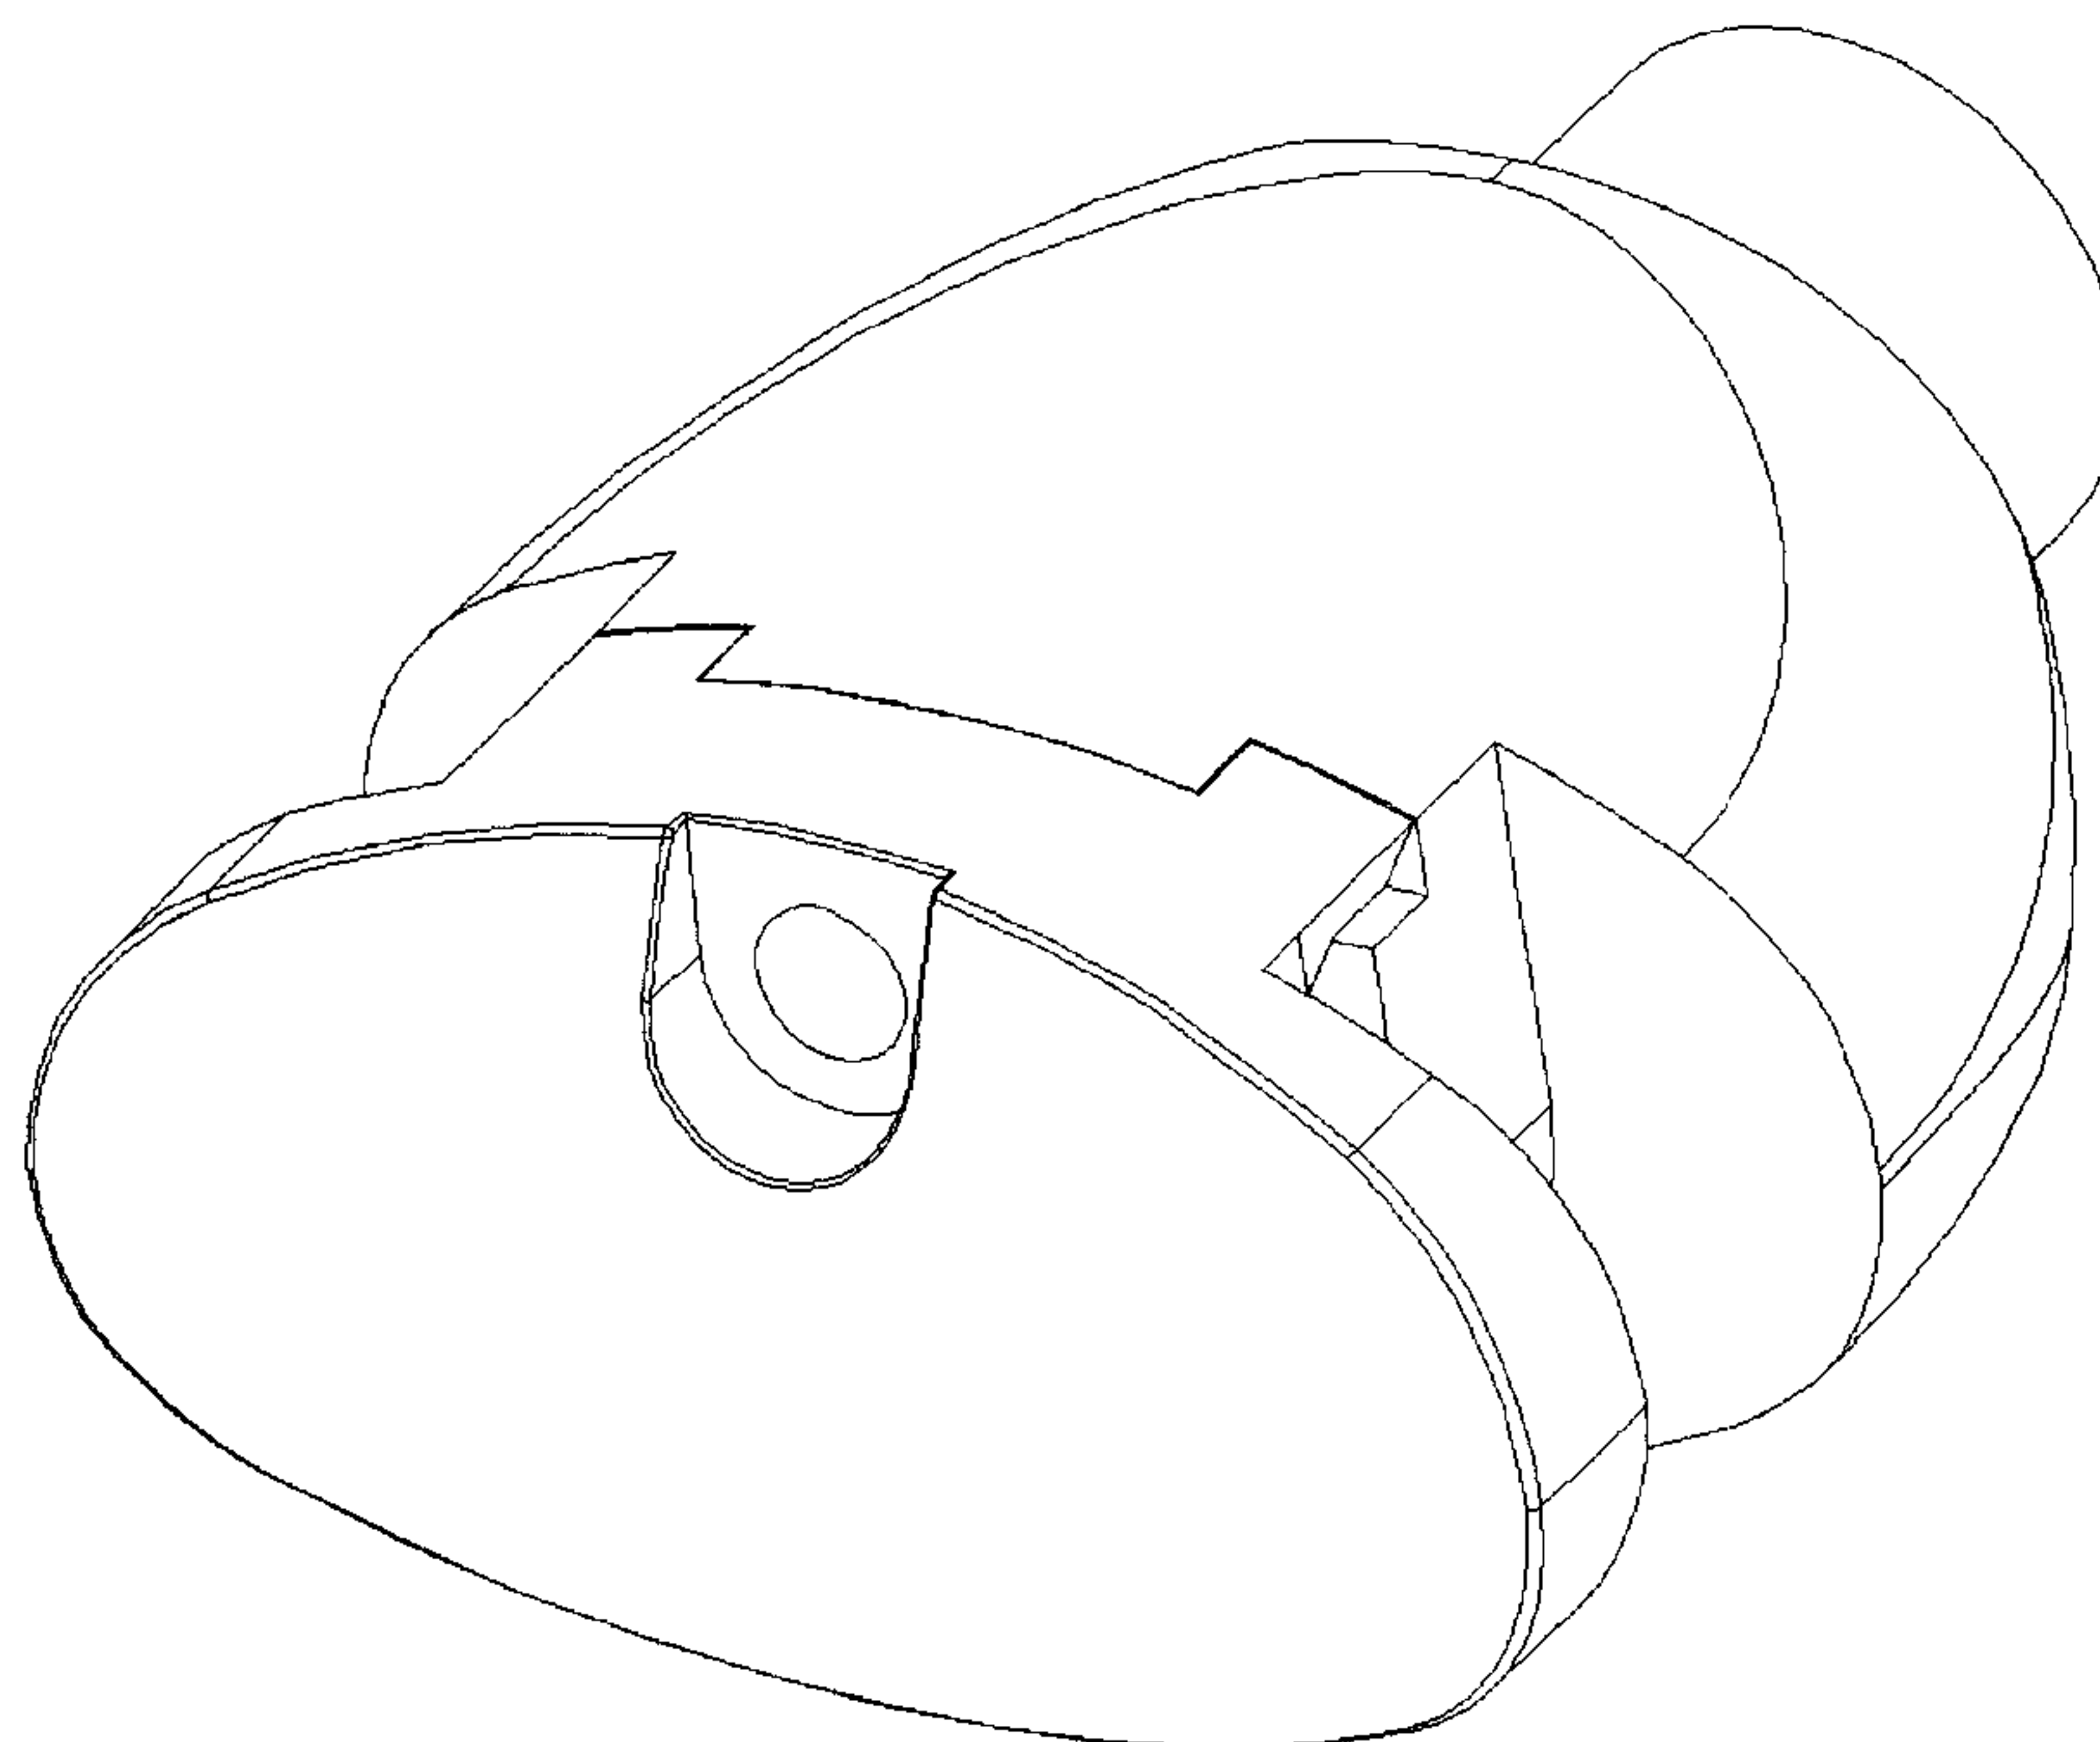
is a bottom view of the deflector shown in FIG. 15;
